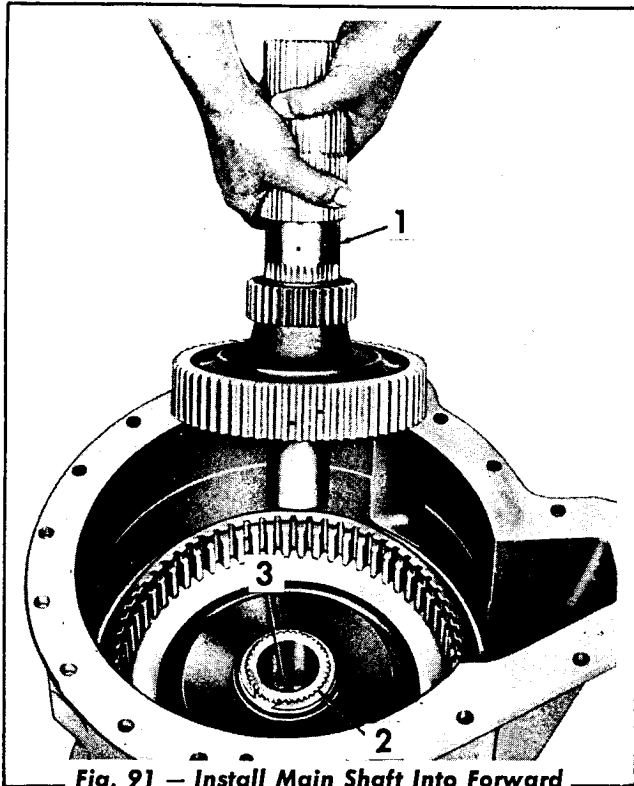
Install Main Shaft Into Forward Carrier Hub
